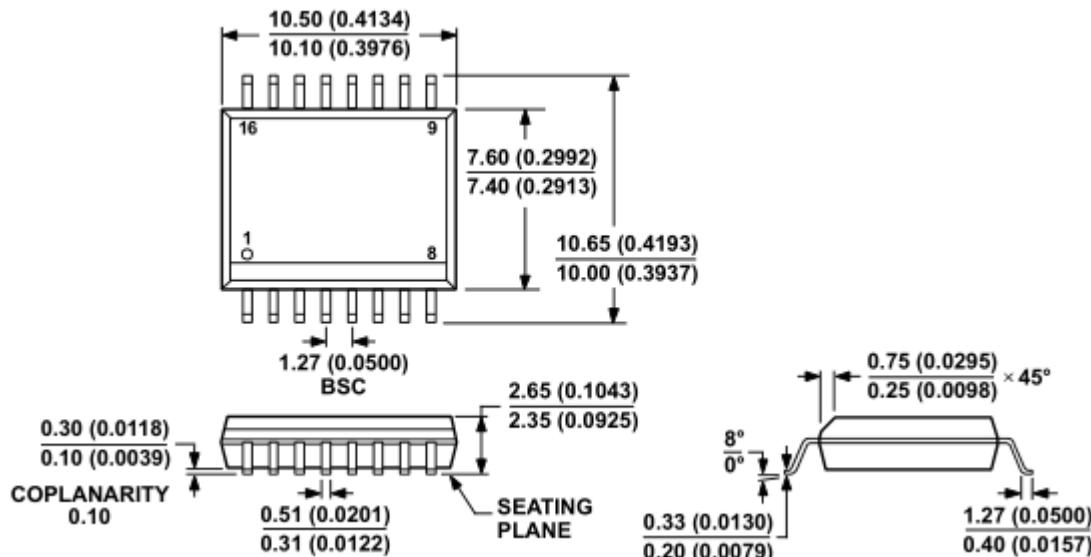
WB SOIC16 Package Shape and Dimension in millimeters and (inches)
